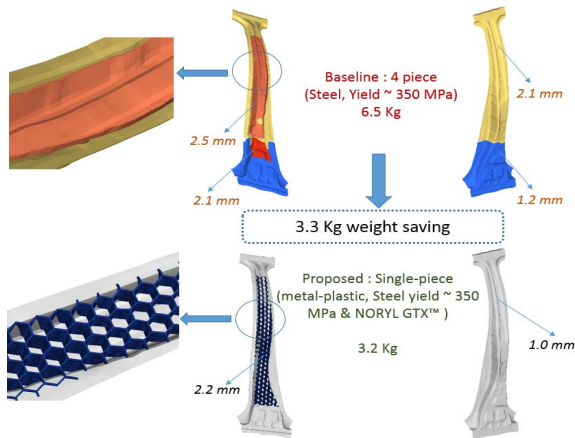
Existing 4-piece steel B-pillar and proposed metal-plastic single-piece B-pillar. Total weight reduction of 6.6 Kg/car. Reinforcement dimensions – 1000 mm * 140 mm * 115 mm.
